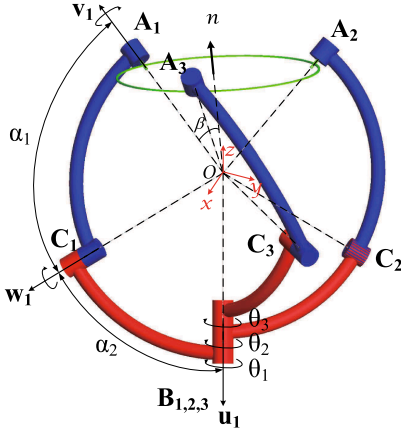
Kinematics of spherical parallel manipulator with coaxial shafts.
